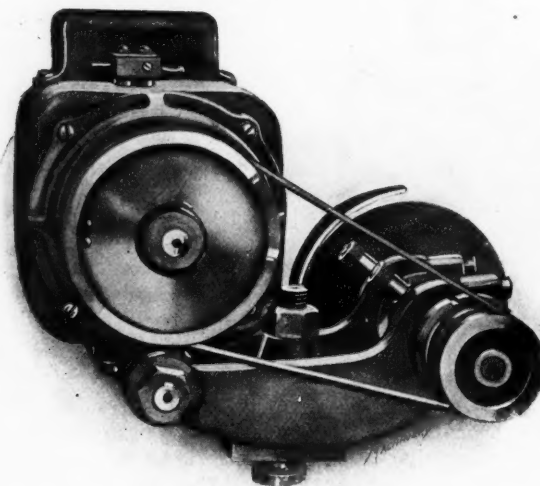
Chicago Pneumatic Tool Co.'s Electric Grinder
